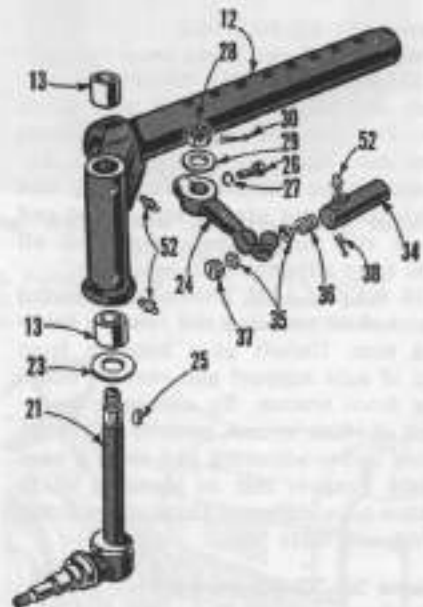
Axle extension and Lemoine type knuckle as used on some adjustable axle models.
